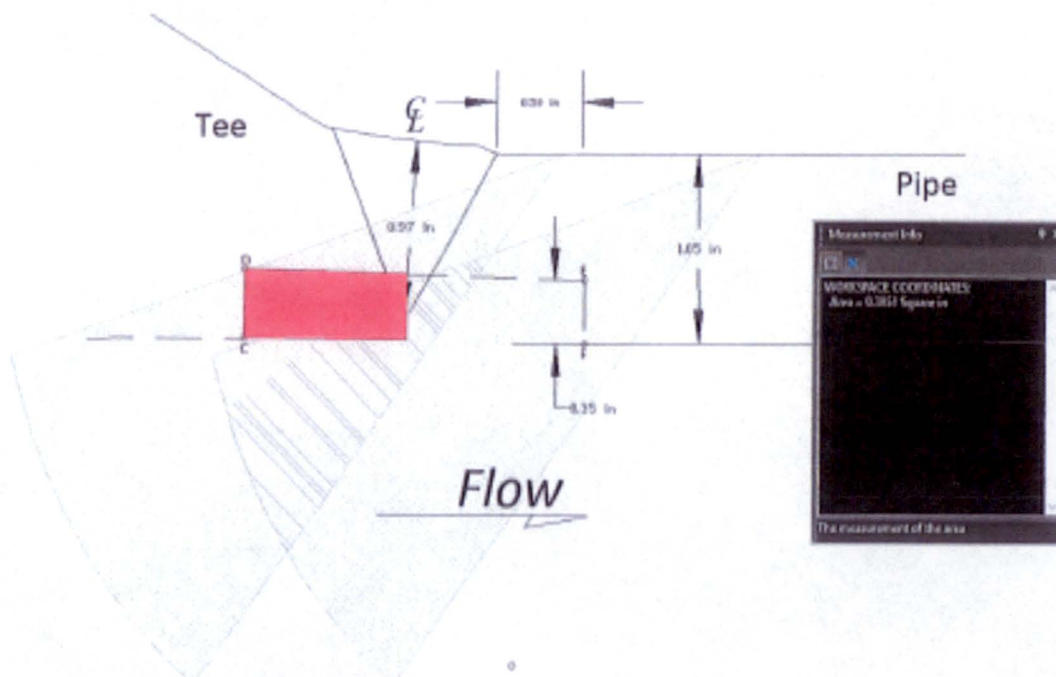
Weld 1-SI-29-23S (Extracted from Reference DRAWING A-53)
